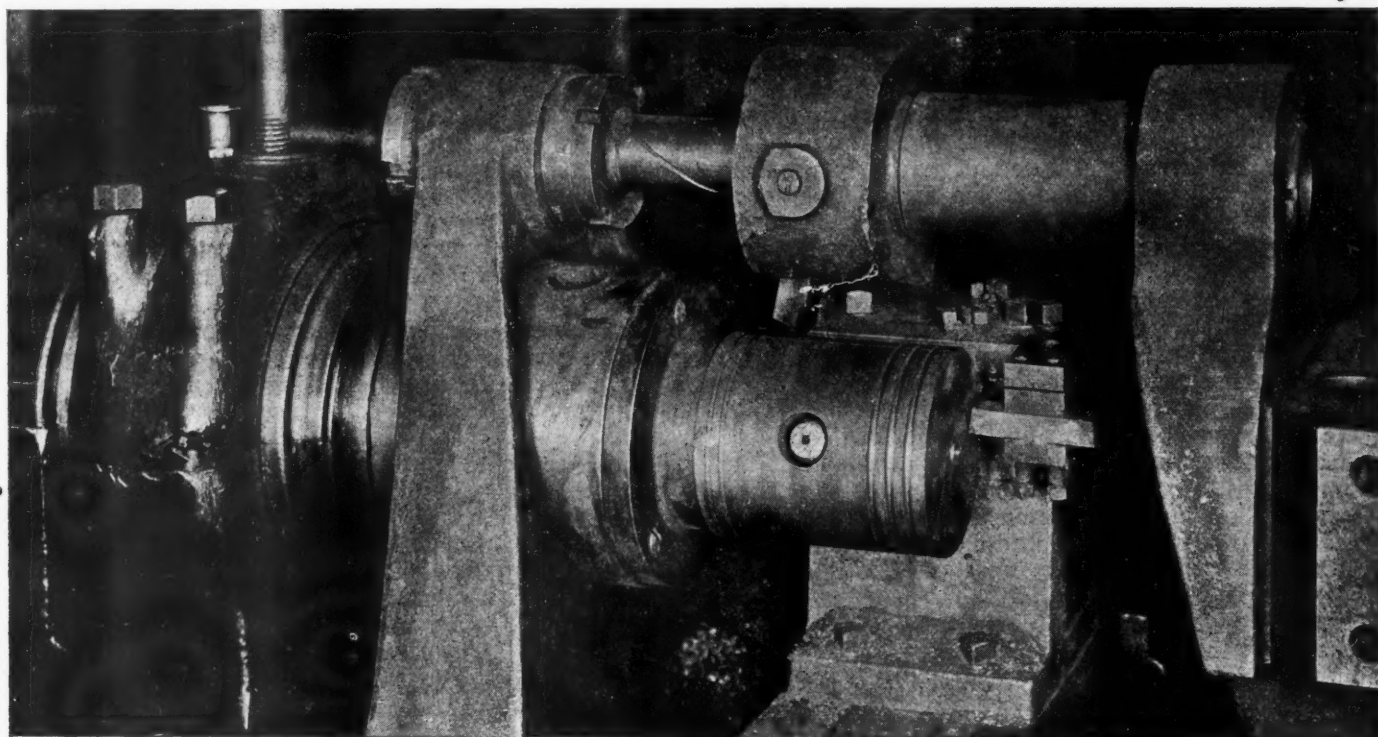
Above—Finish turning and rough grooving heads. Fig. 5—Below—Drilling oil relief holes at 45 deg. on sensitive drill with indexing fixture
